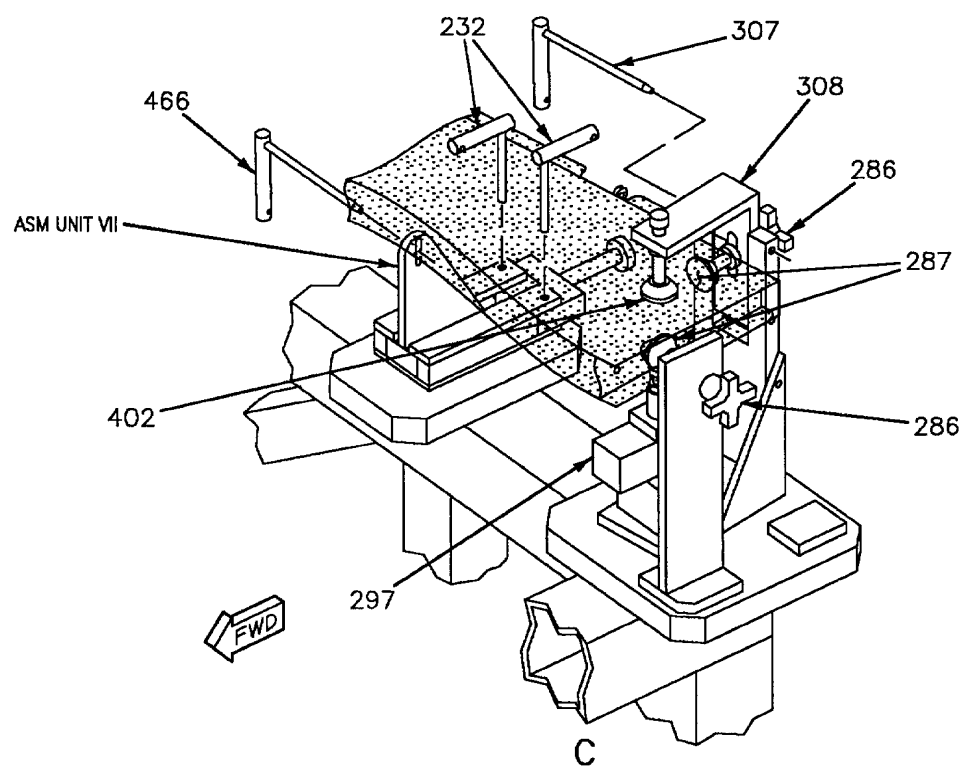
Loading Wing into Drilling Fixture (Sheet 1)
